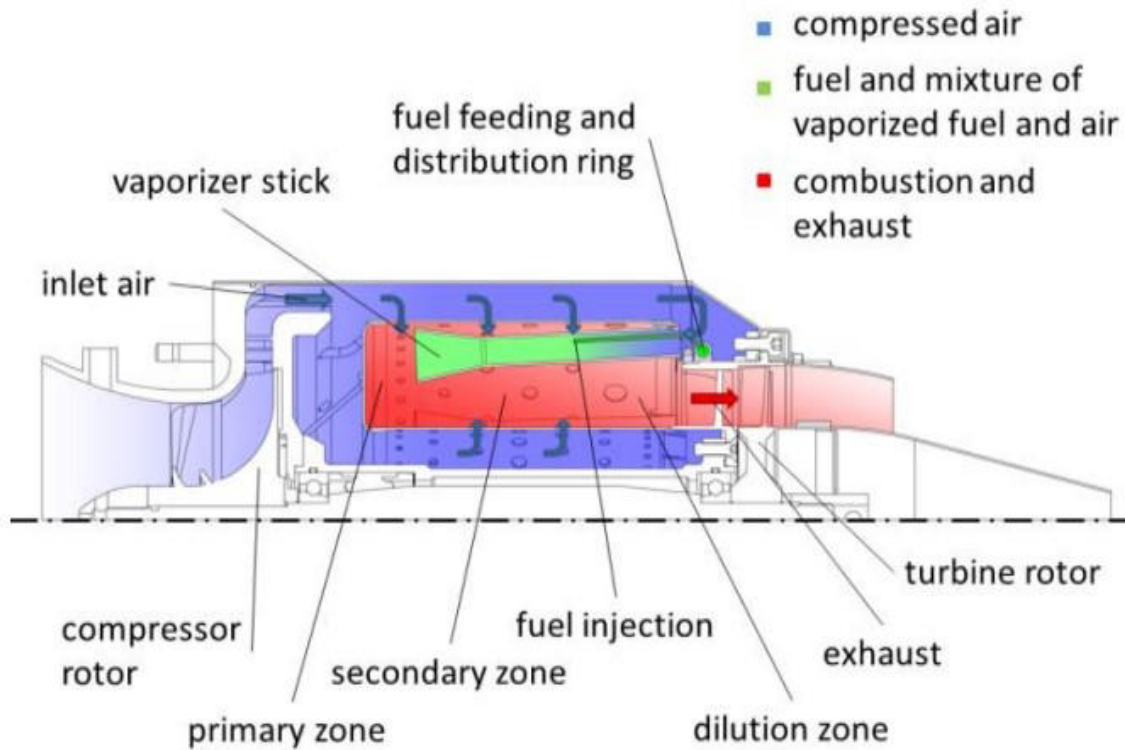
Fuel-injection scheme shown through the cross-section of a small-scale gas turbine engine [24]
